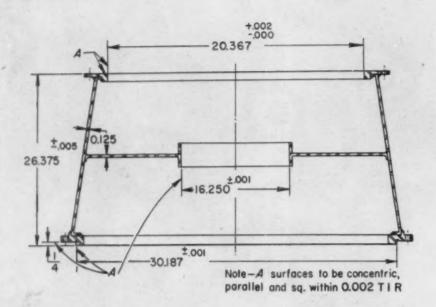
Typical jet engine weldment. Machining requirements are that the A diameters and faces be concentric, square and parallel, as applicable within 0.002-inch TIR, when rounded up in the chucking fixture or assembled in the engine.
